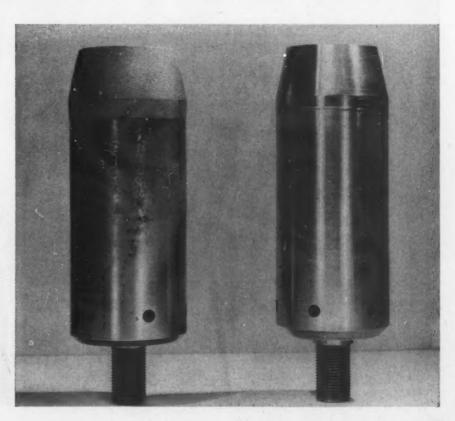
Right — Large mandrel with hard-faced nose section shown at left after spray welding but before bonding, right, after finishing
